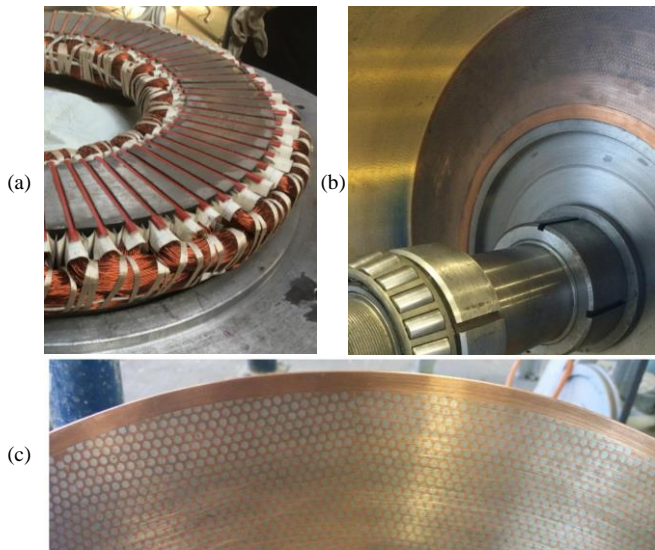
Manufactured parts of the machine. (a) Stator and winding. (b) Rotor and shaft. (c) Anisotropic matrix rotor.
